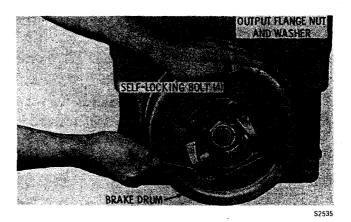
Removing parking brake drum bolts (-1 models)
